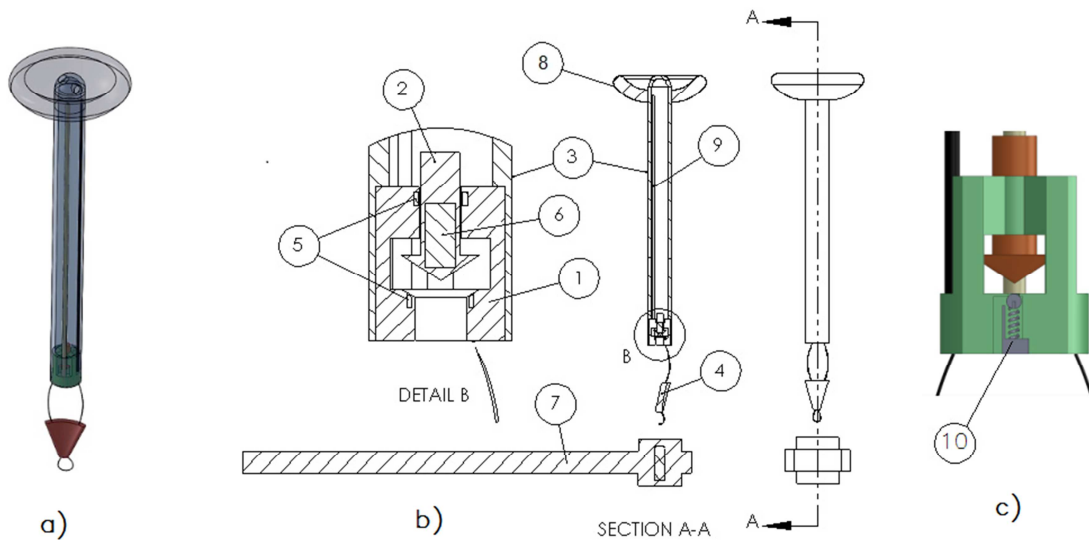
a) 3D view b) The new device details: 1) control valve block 2) control valve piston 3) tube 4) anchoring part 5) upper and lower metallic rings 6) valve piston magnet 7) external magnet 8) anchoring balloon 9) balloon saline way 10) safety valve c) Safety valve section view (in gray)
